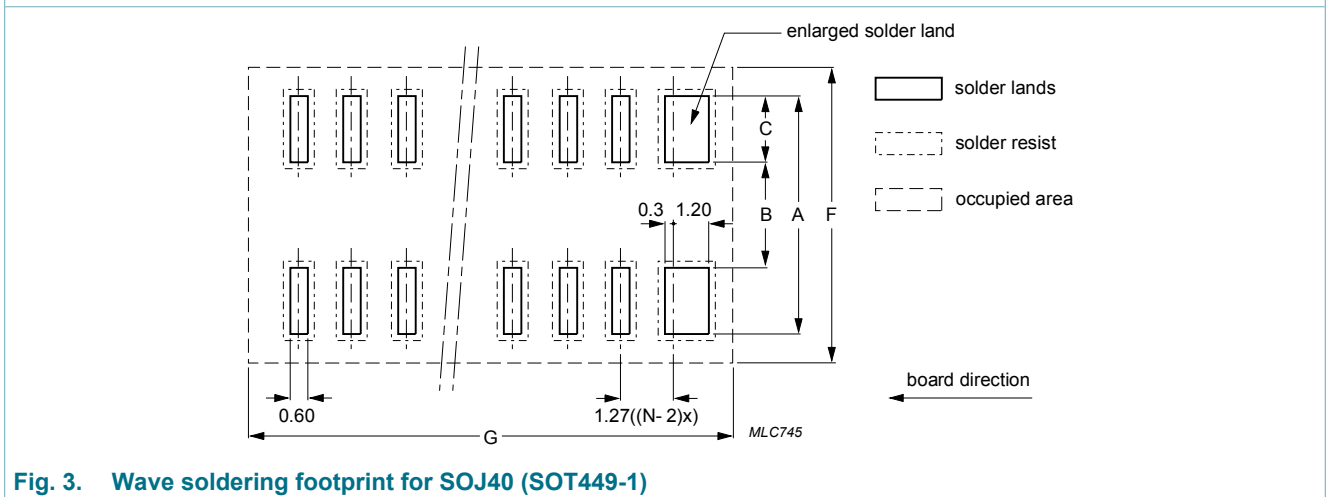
Wave soldering footprint for SOJ40 (SOT449-1)
